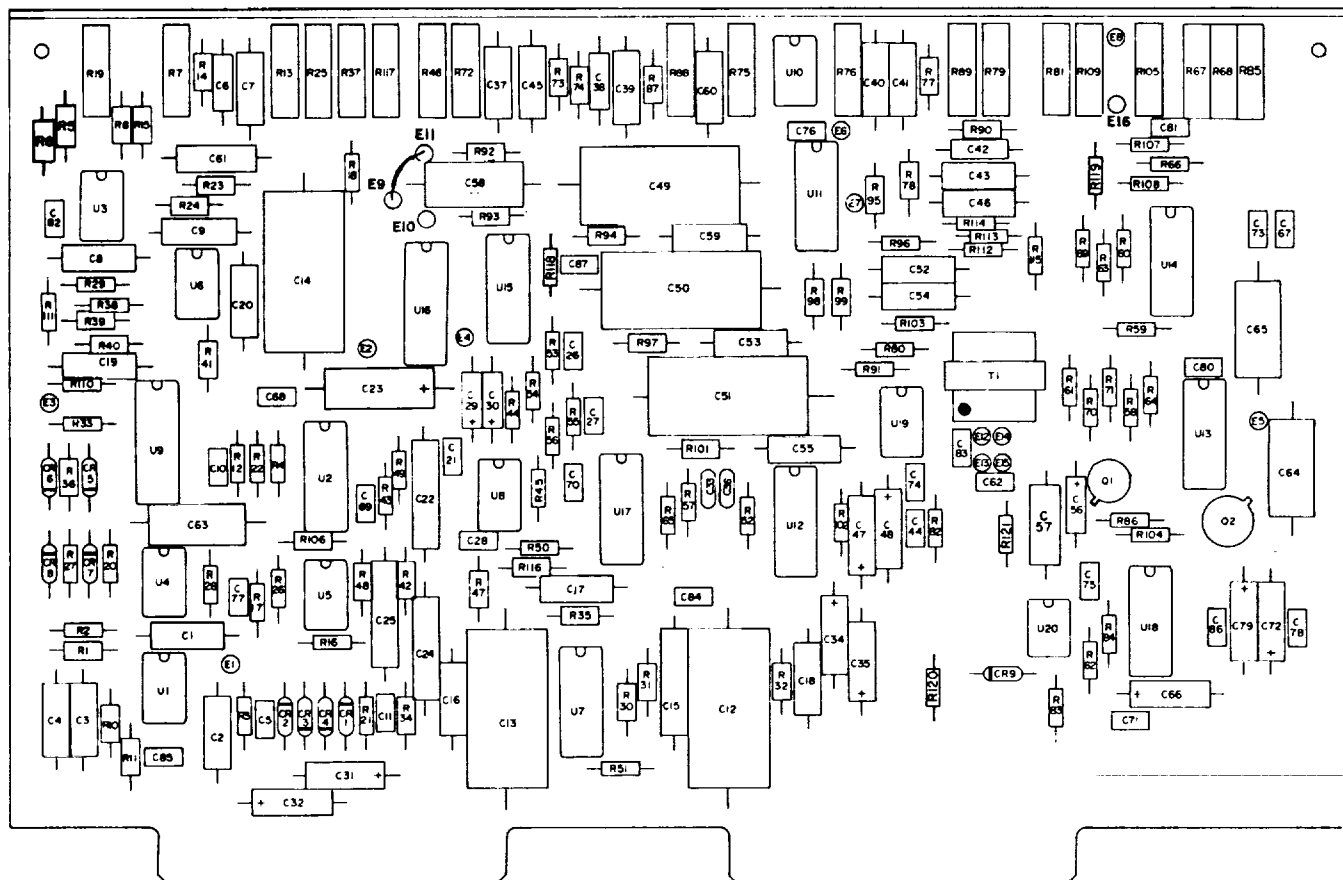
XMTR/RCVR Voice Buffer Circuit Card Assembly, 1A2A5
